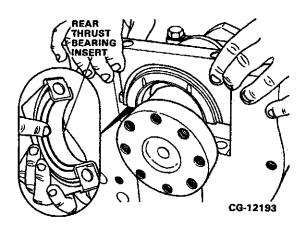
Install Rear Thrust Bearing Cap and insert
